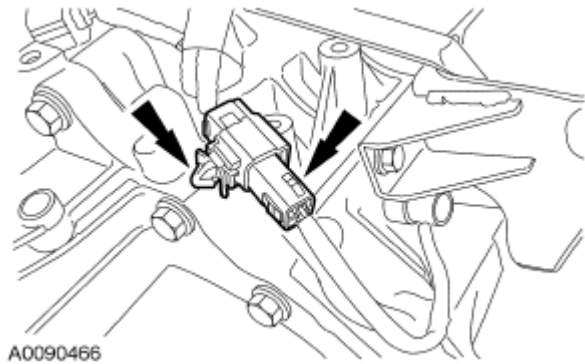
Locating Vehicle Speed Sensor (VSS) Electrical Connector
